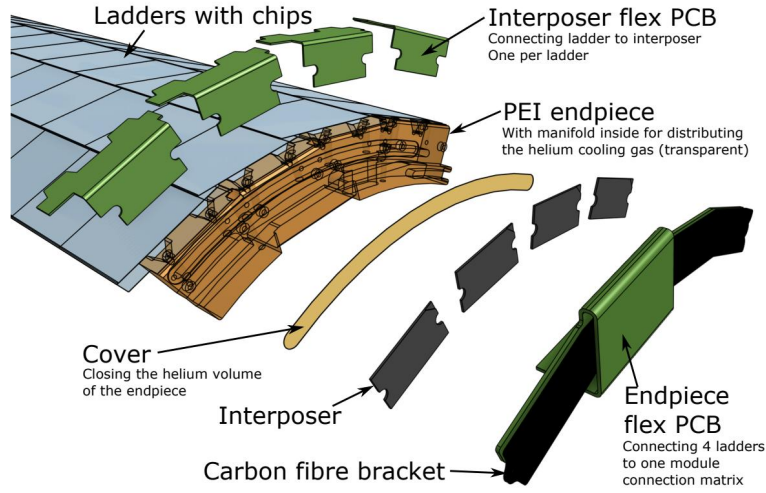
Outer layer assembly showing the end-piece region of a single module [19].
